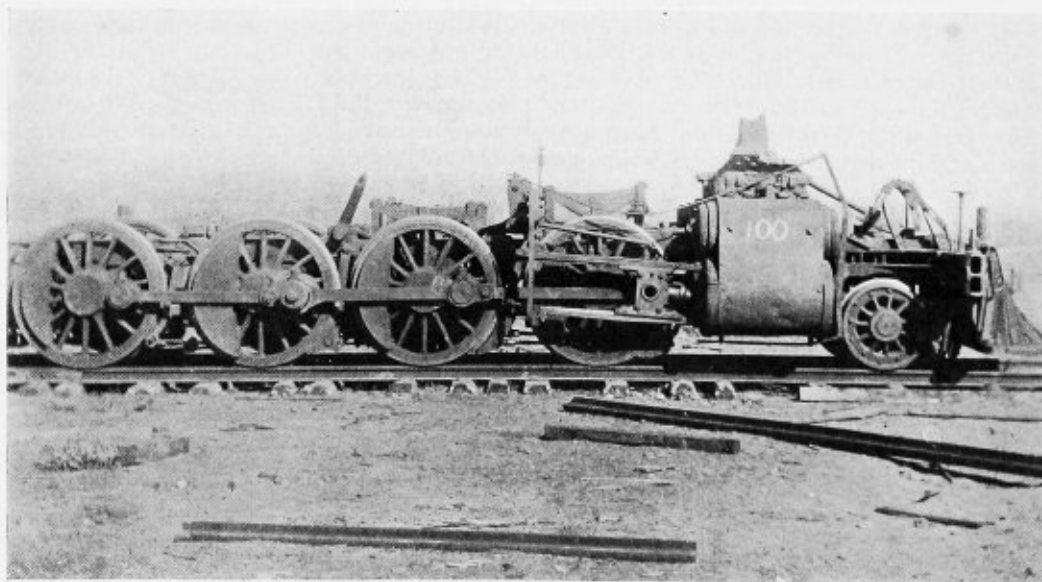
The Explosion Lifted the Boiler Entirely Clear of the Trucks, Which Remained on the Tracks
